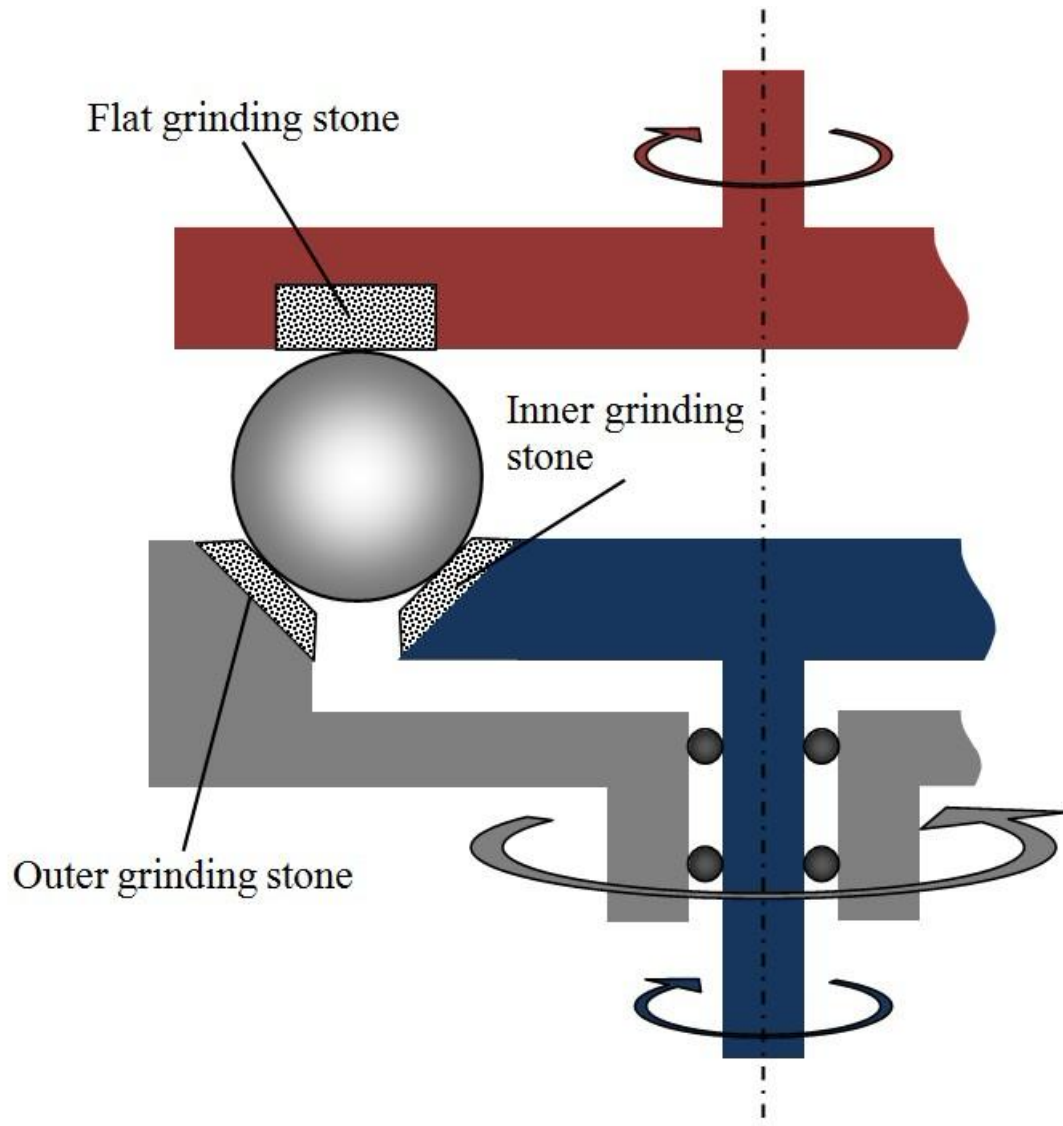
Schematic view of spin angle controlled grinding method [28]
